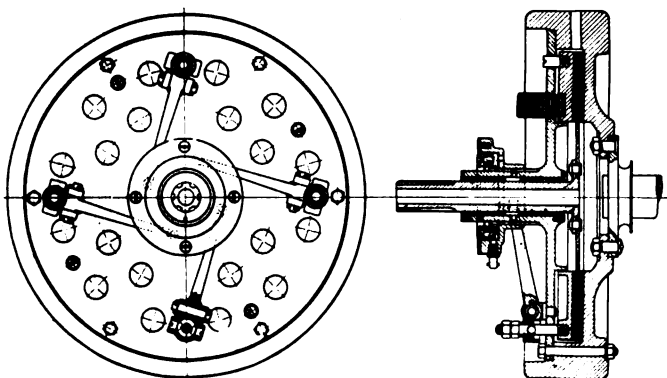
SECTION THROUGH THE CLUTCH USED ON THE TYPES-J AND L BUSES
